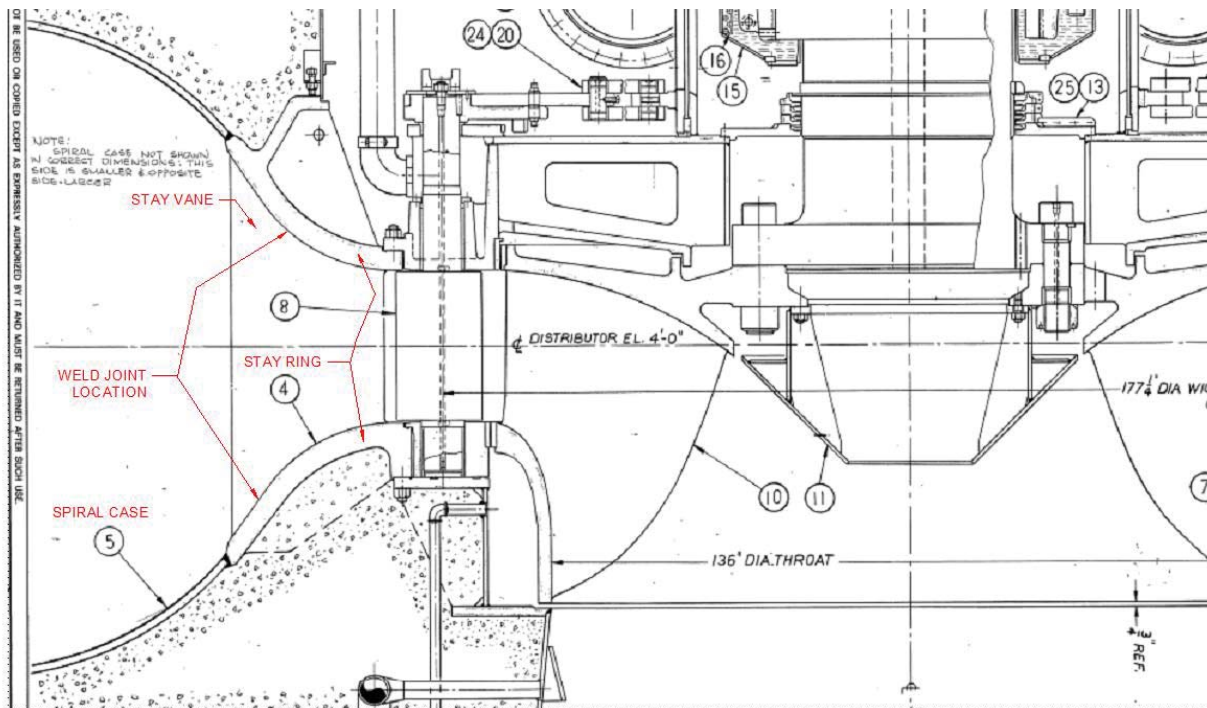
Stay Ring and Vanes, OEM Turbine Cross-Sectional View
